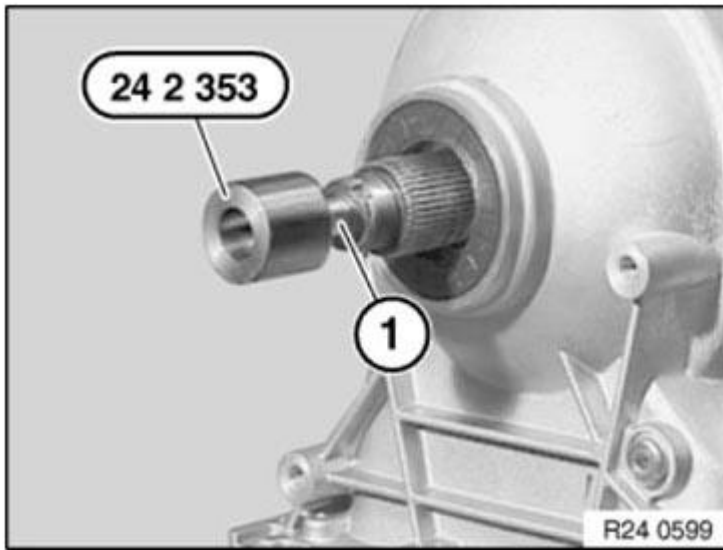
Connecting Special Tool 24 2 353 To Output Shaft
